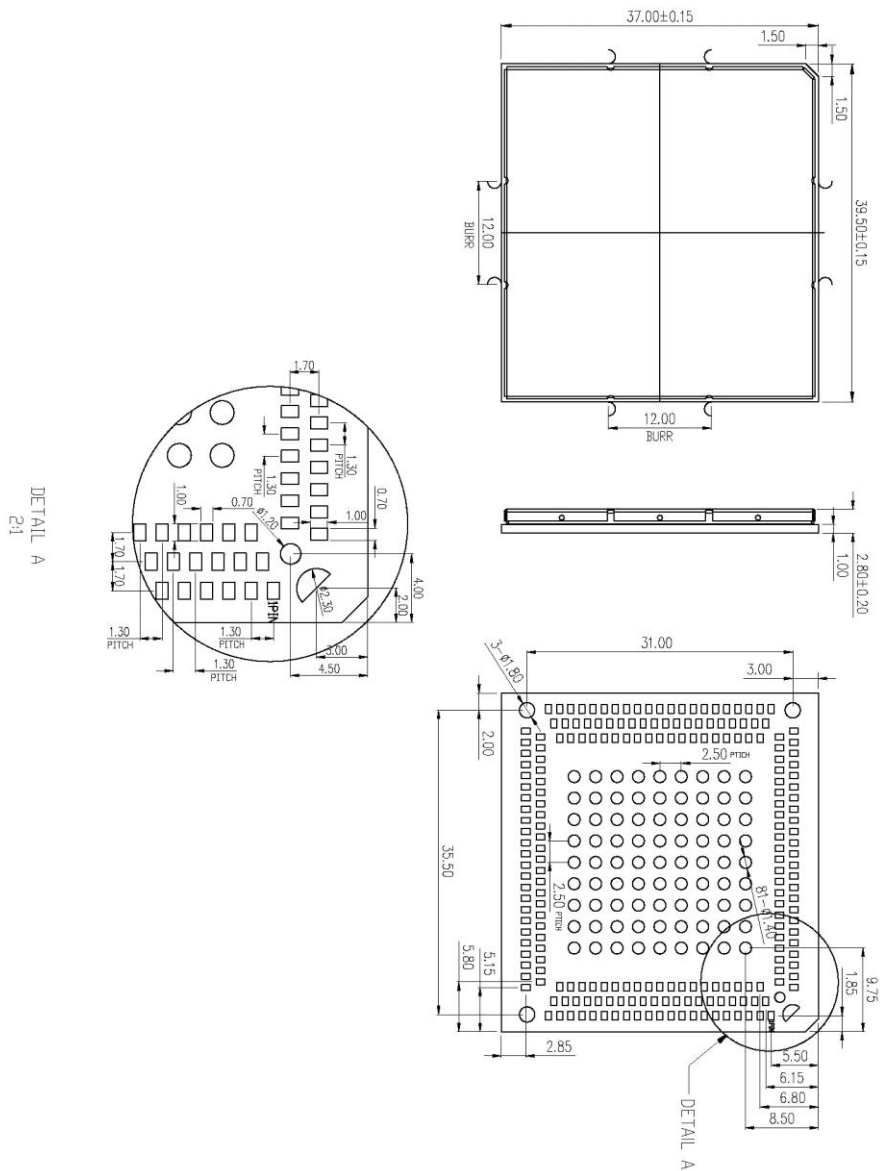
Dimensions of SIM7912&SIM7906 (unit: mm)
